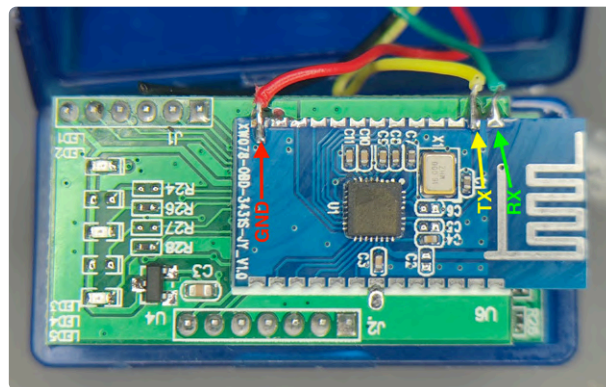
UART jumper wire connections soldered onto the bluetooth PCB of the PIC-based ELM327 module.
